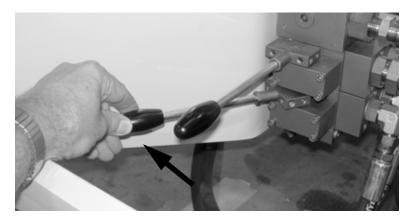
Push the autofeed lever to the left to retract the saw bow. You will need to have hydraulic power on to operate the autofeed drive.
